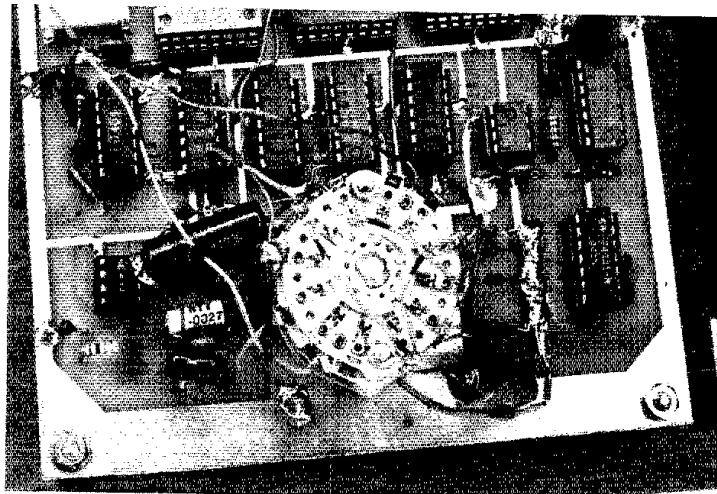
Component side of the double-sided board near S1. The board shown is a prototype and differs slightly from the final version.
